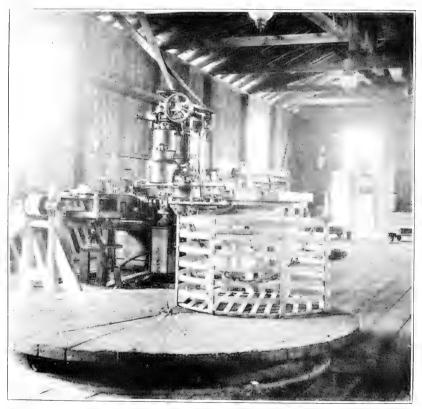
INTERIOR OF OYSTER CANNERY, SHOWING PACKING TABLE, CAPPING MACHINE, AND BASKET IN WHICH THE FILLED CANS ARE "PROCESSED."
